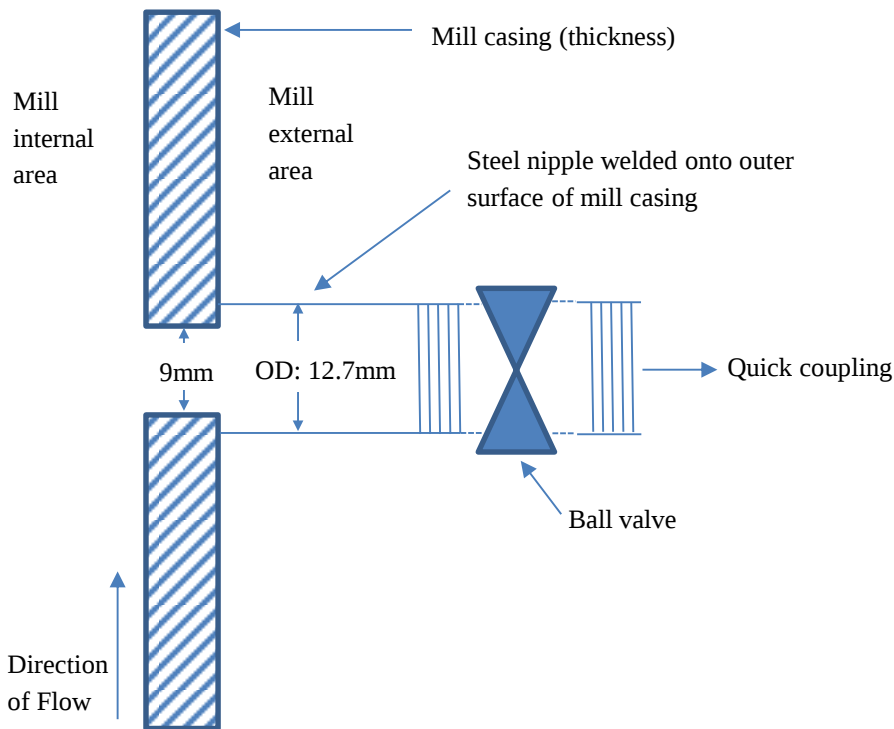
Cross section of pulveriser wall showing the tapping point installation architecture (Drawing is not to scale)
